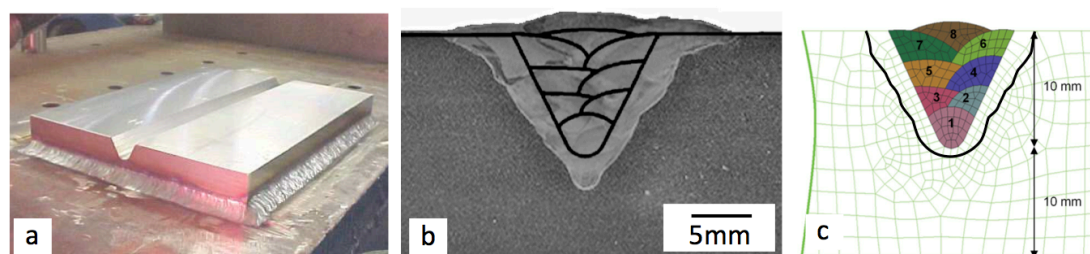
a) A photograph of the grooved plates prepped for welding, b) optical macrograph showing the fusion zone and the weld lay-up sequence for the gas metal arc welds, c) finite element mesh used in the multipass weld model showing each pass and the 1500°C thermal contour that approximates to the fusion zone boundary.
